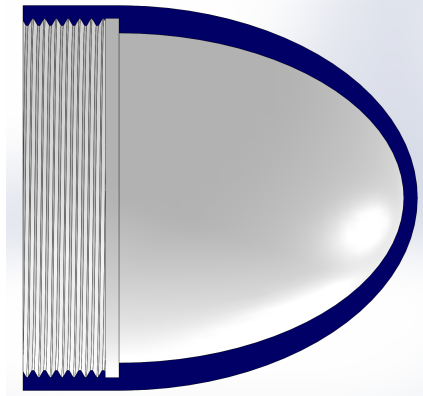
3D section view of the rear fairing showing the outer and inner profiles as well as the female threading. The blue section is the cut plane.
